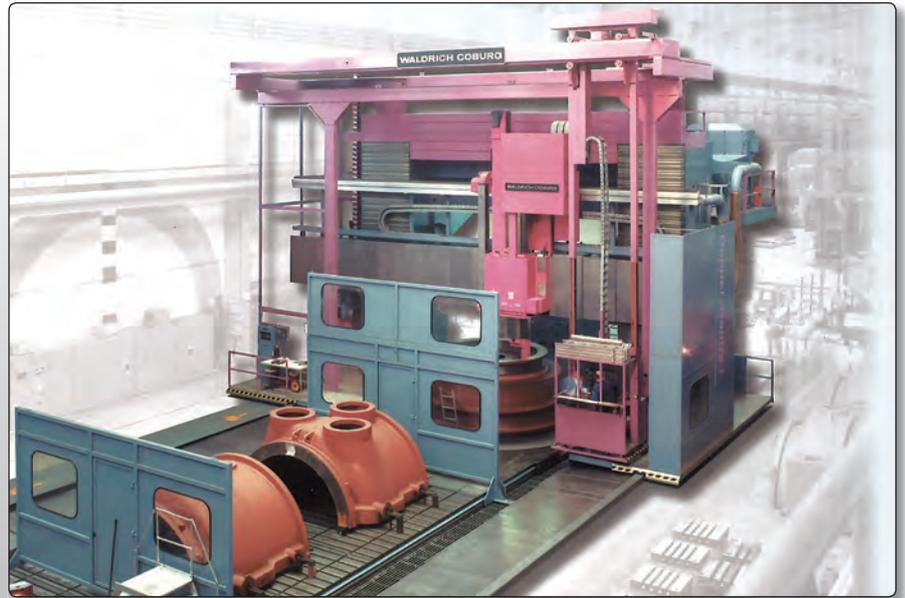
Machining a setting of more workpieces on one machine [Waldrich-Coburg]
